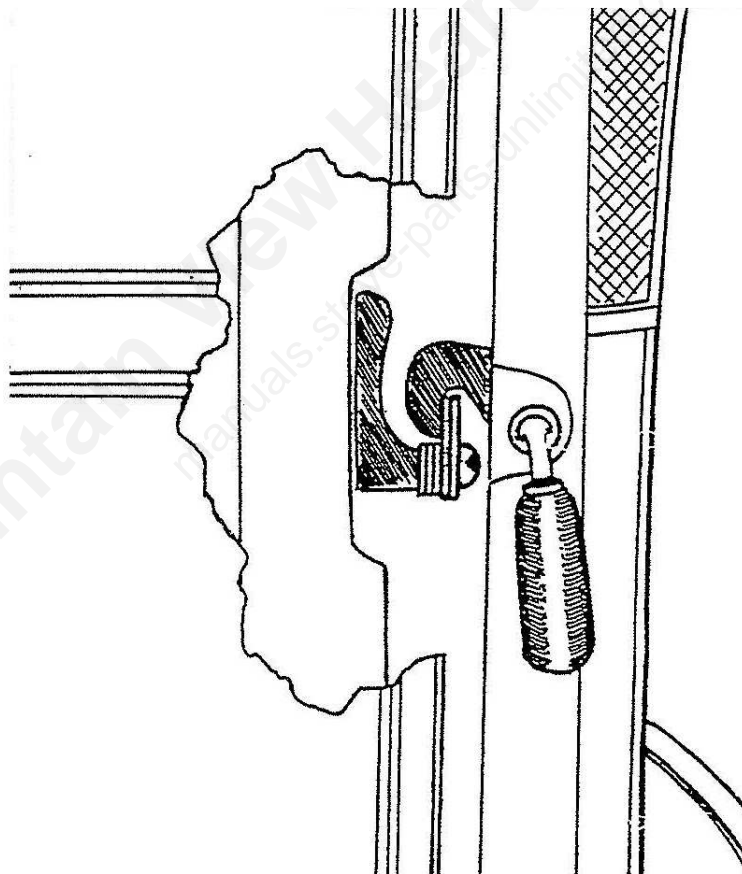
DETAIL SHOWING THE COMPONENTS AND ASSEMBLY SEQUENCE OF THE STATIONARY POSITION OF THE LOADING DOOR LATCH MECHANISM.
